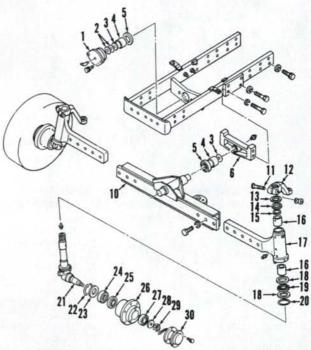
Exploded view of adjustable tread width front axle assembly used on Model 1520. Refer to Fig. 3 for legend except for axle extension (17).
